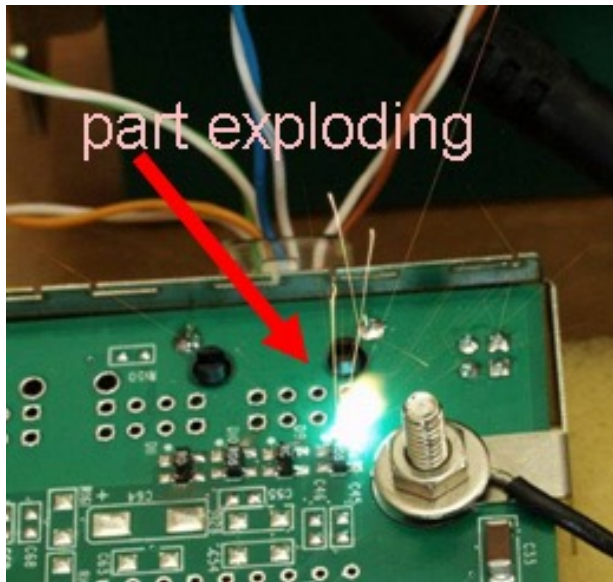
A part (a resistor) exploding under pulse testing, p. 6-1
